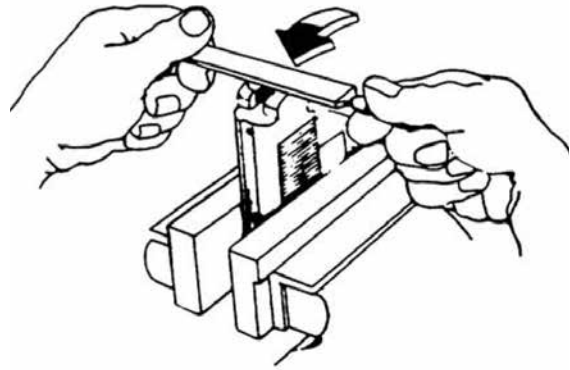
A metal checkering file may be used for most of the serrating operations required to install custom sights on a Colt Model 1911 pistol.
